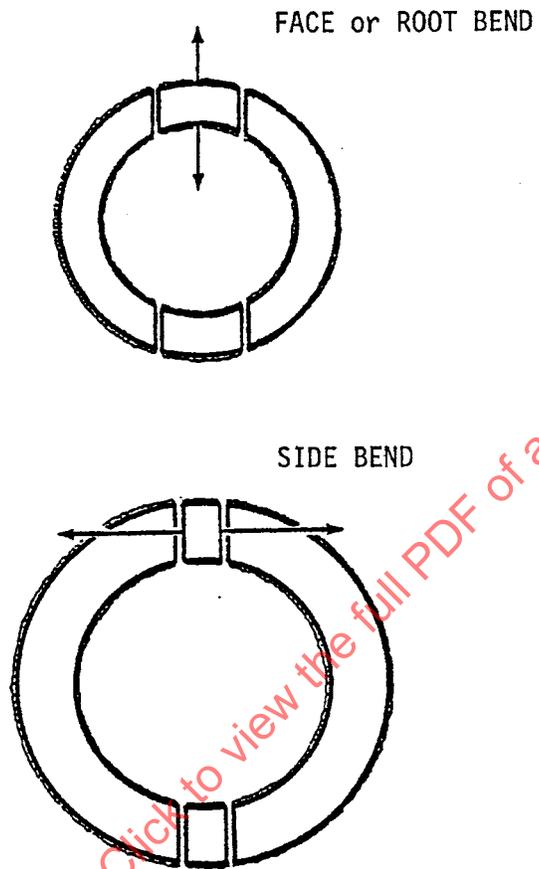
Blank locations for bend specimens in groove-welded tube.
